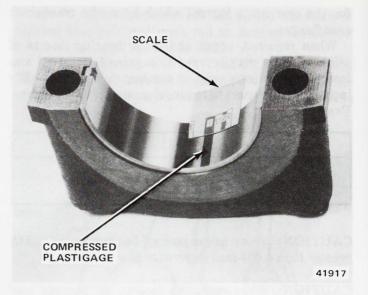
B-119 Checking Main Bearing Clearance with Plastigage
